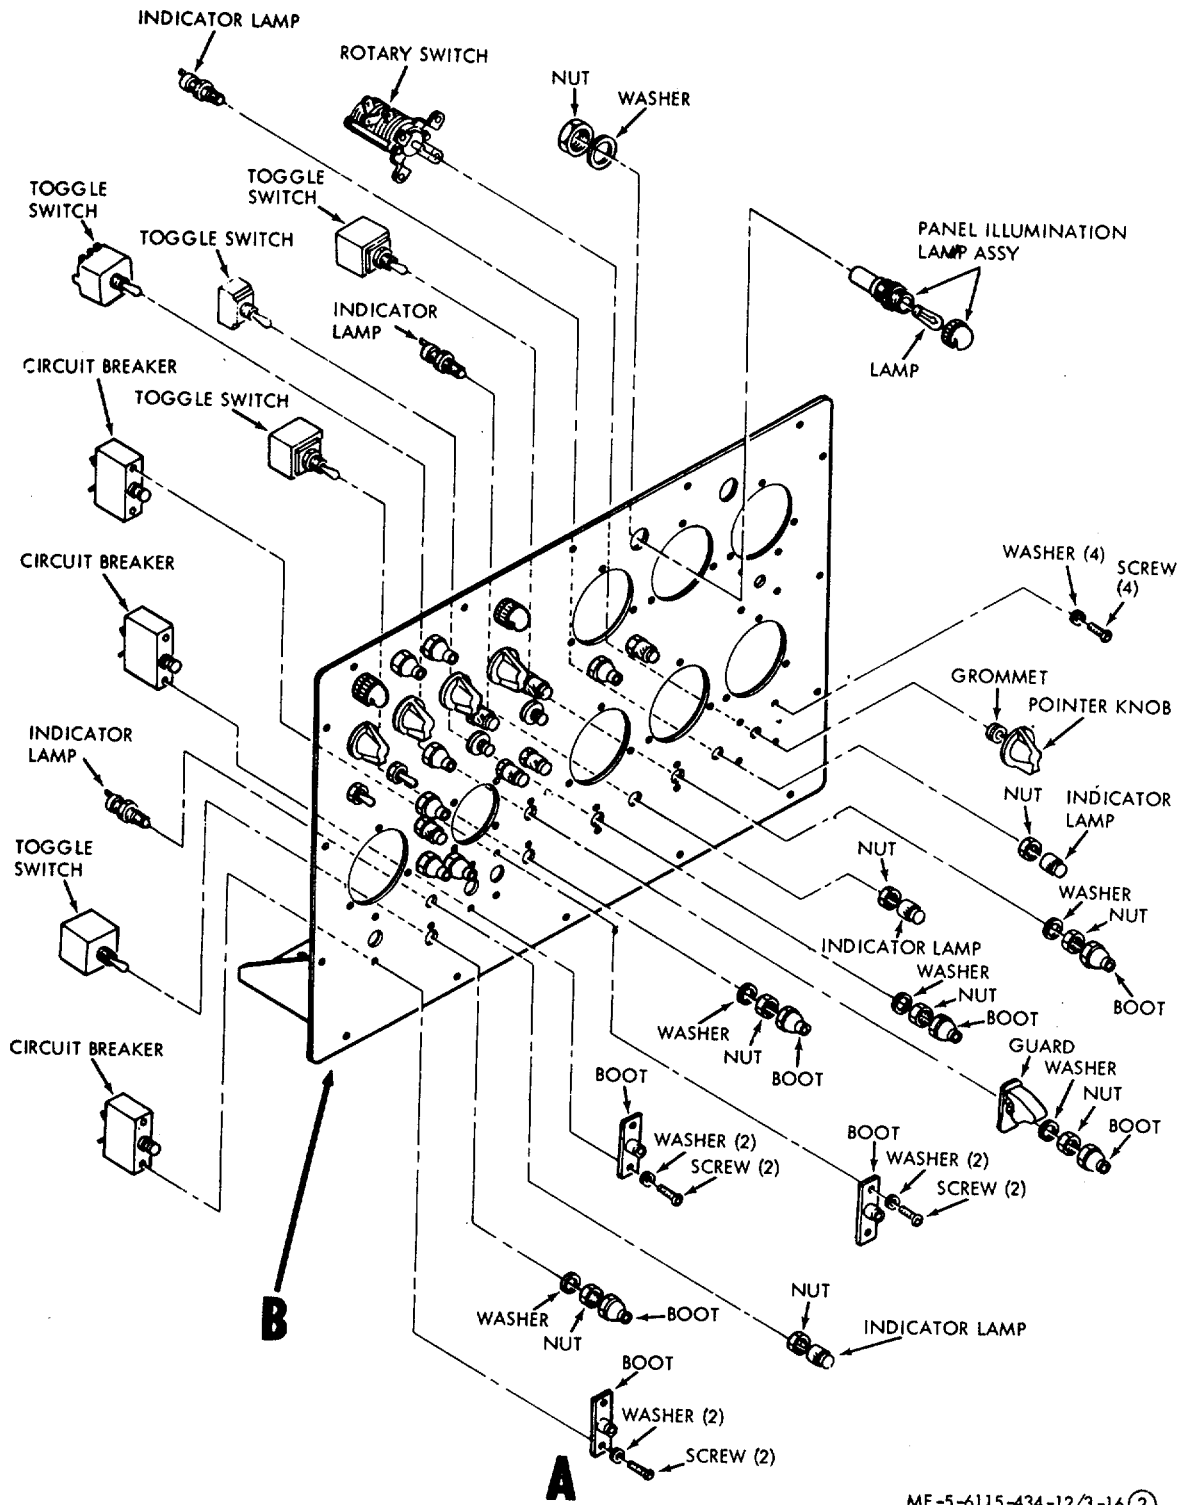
Instrument panel assembly component replacement (Sheet 2 of 4).
